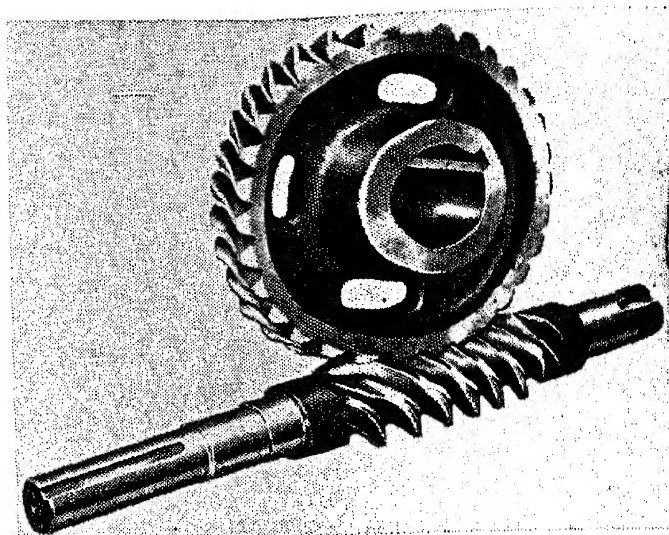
A worm and worm gear. (Courtesy Foote Bros. Gear and Machine Co.)
